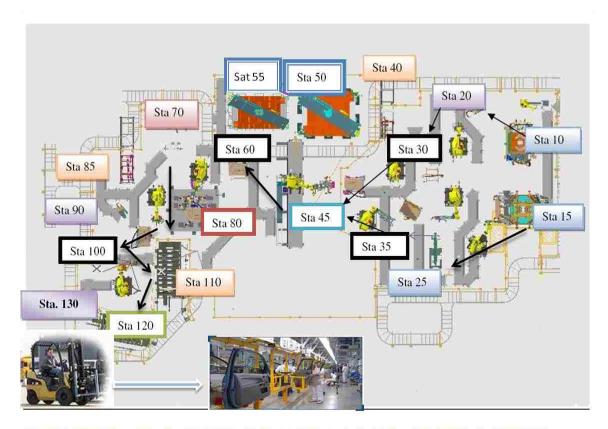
Manufacturing process of modules assemblies (stamped parts)
